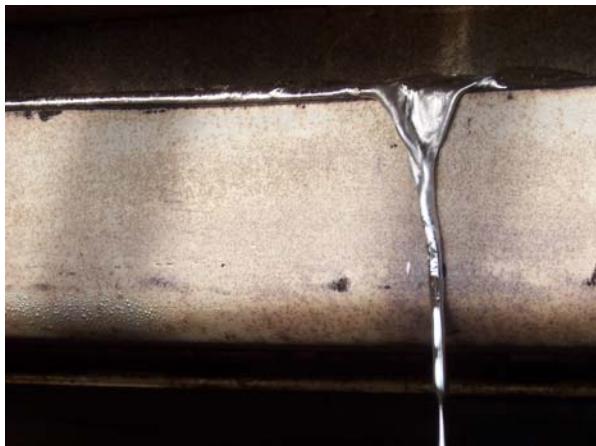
Molten Aluminum overflowing on the sides of the carbottom
